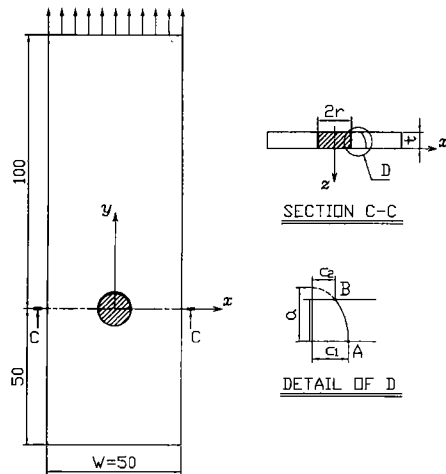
Configuration of an elliptical arc through crack at mechanical fastener holes
